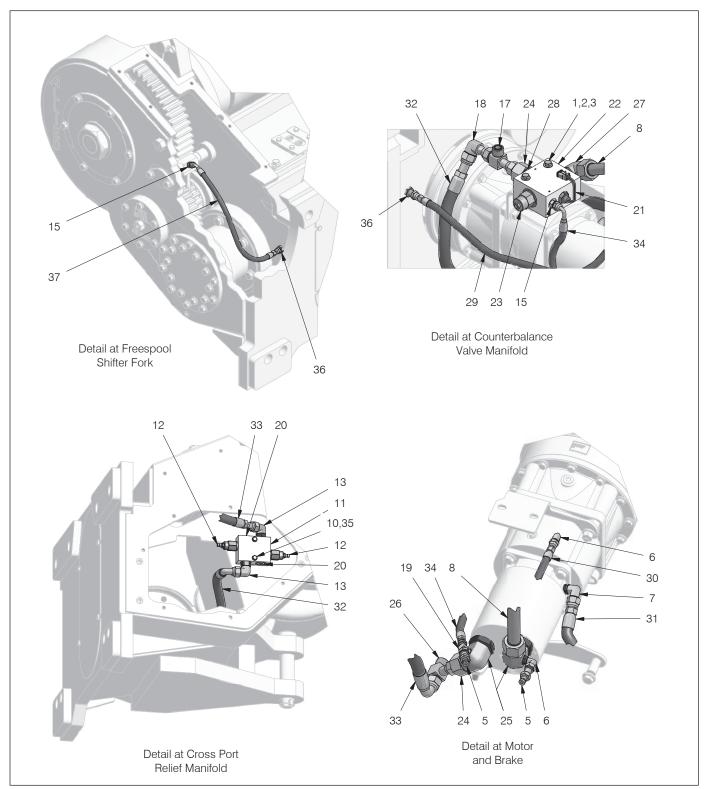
Hydraulic System Components, Rescue Winch_1
